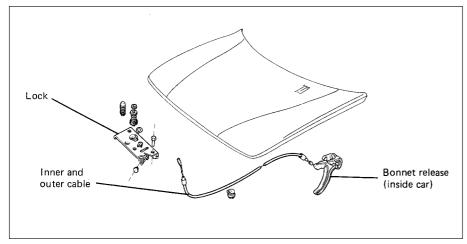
Bonnet lock and release cable (Sec 8)
